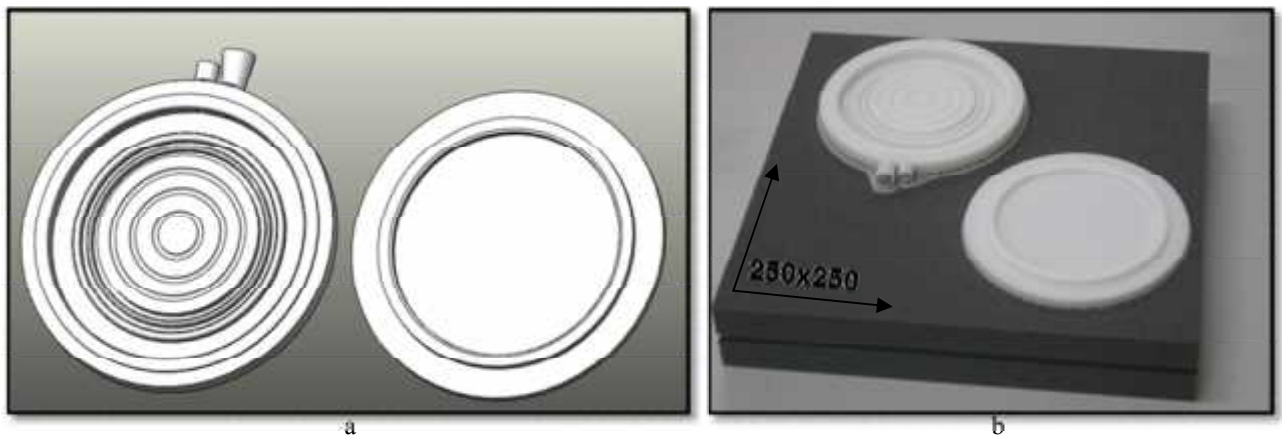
a) CAD model of No 1 mould prototype; b) FDM No 1 mould prototype
